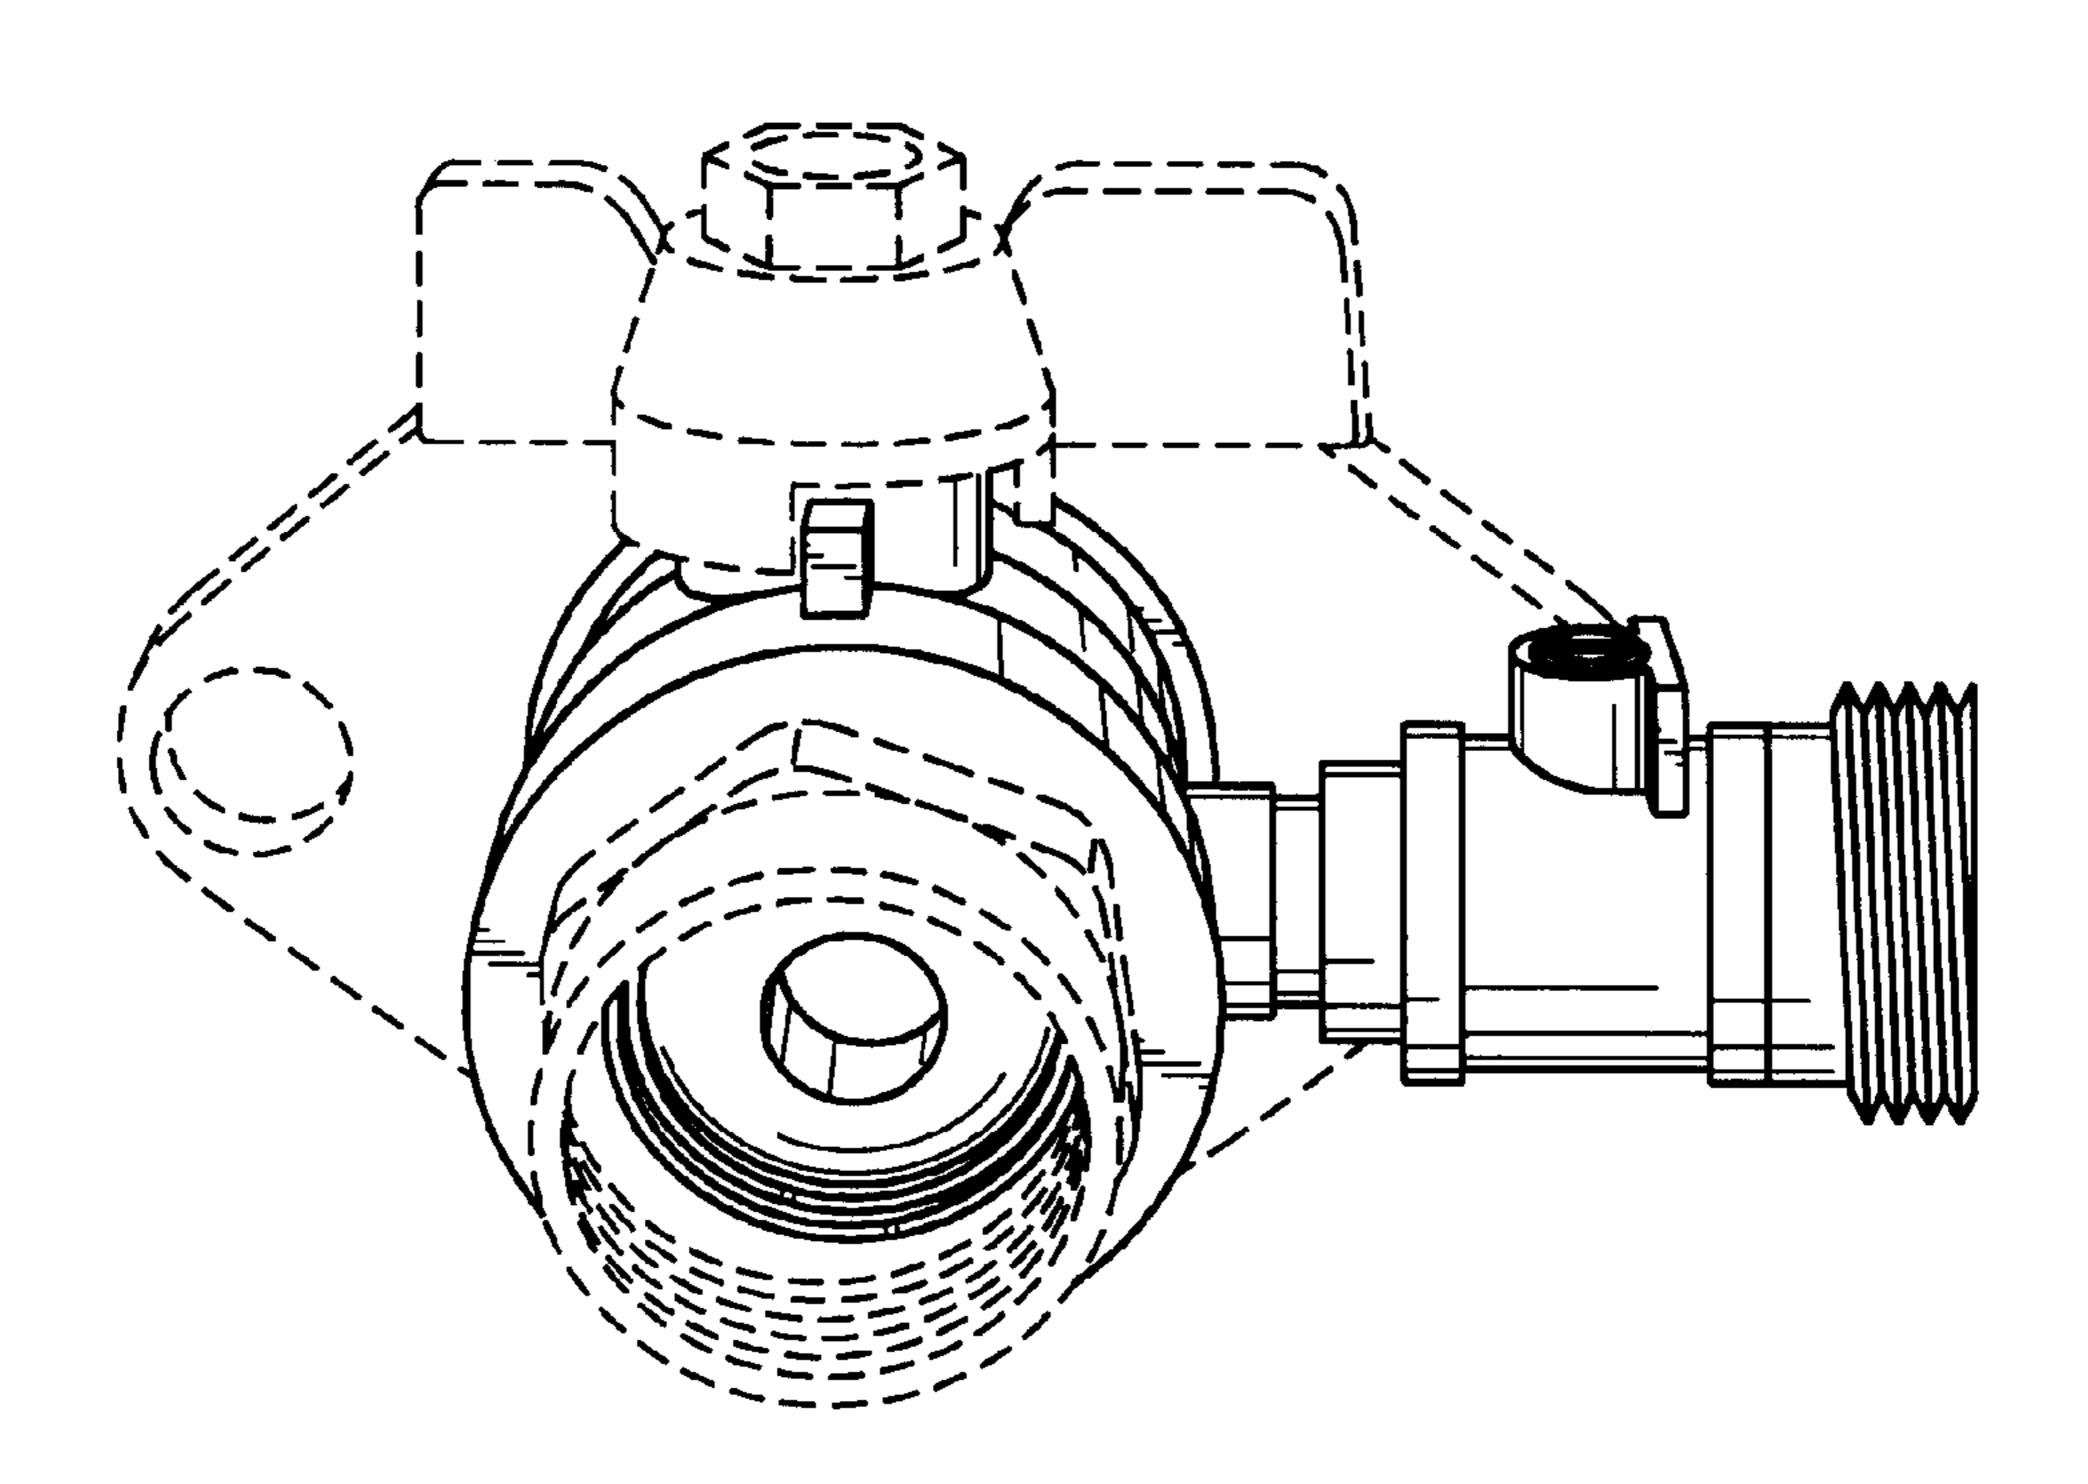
is a bottom view thereof with the main ball valve open; the position of the drain valve not possible to determine in this view;
